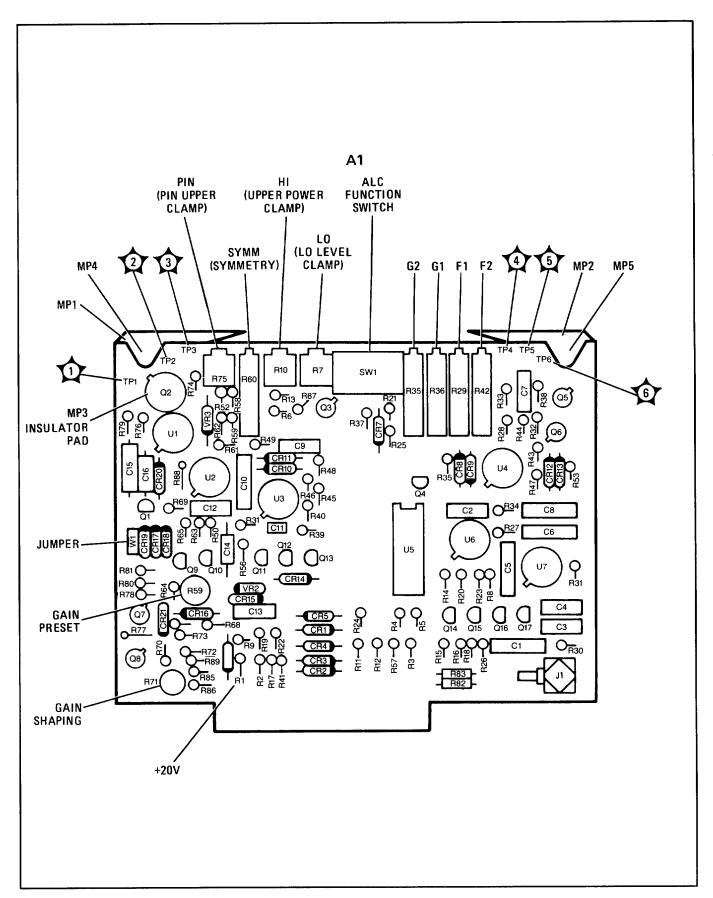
A1 ALC Assembly, Component Locations (CHANGE C)
